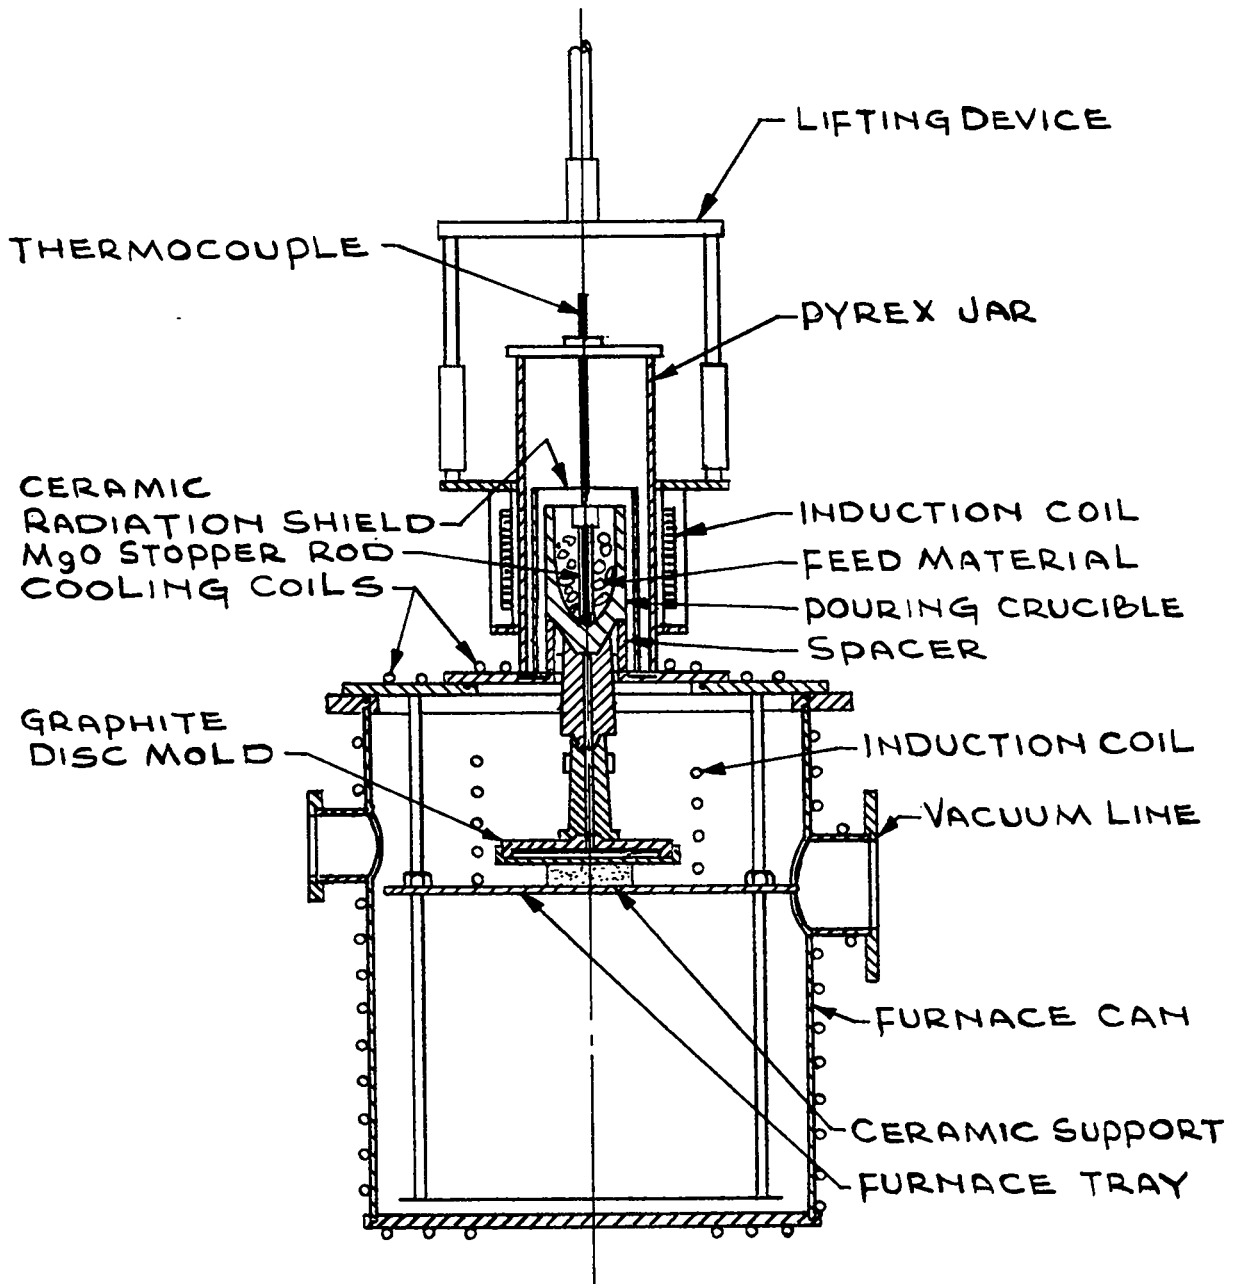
Pu Vacuum Casting Setup Using Stopper Rod
